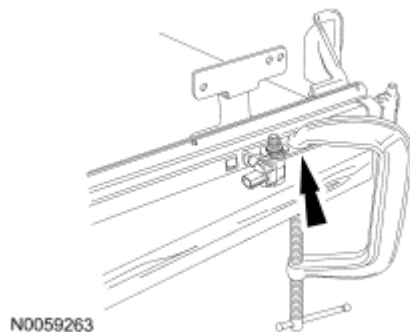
Clamping Side Plate To A Bench Or Table To Compress Spring Washer On Affected OCS Weight Sensor Bolt
